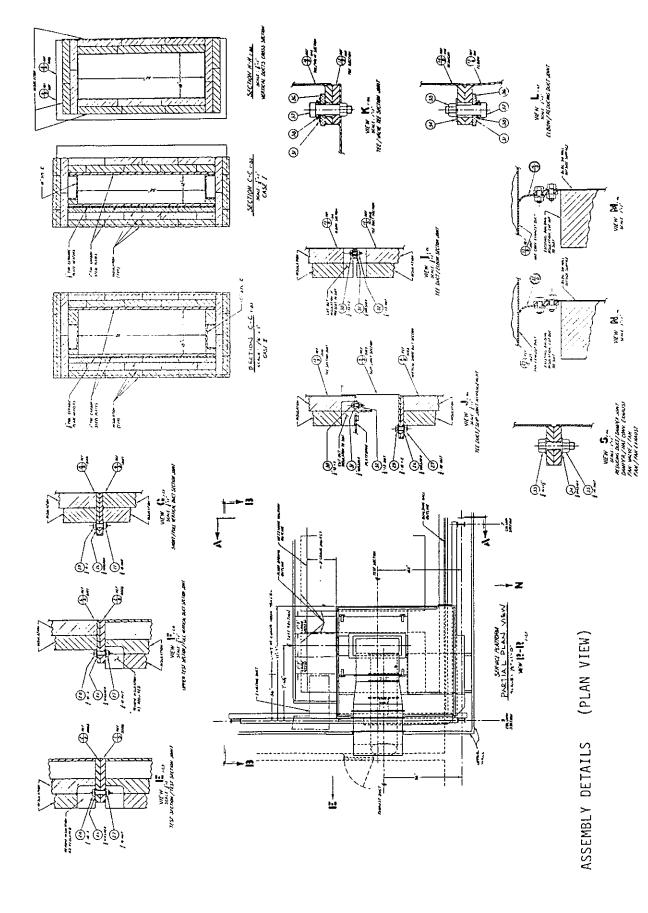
ANL Shutdown Heat Removal Test Assembly (Reduction of ANL Dwg. No. R0408-0004-DE, Sheet 1 of 4).
